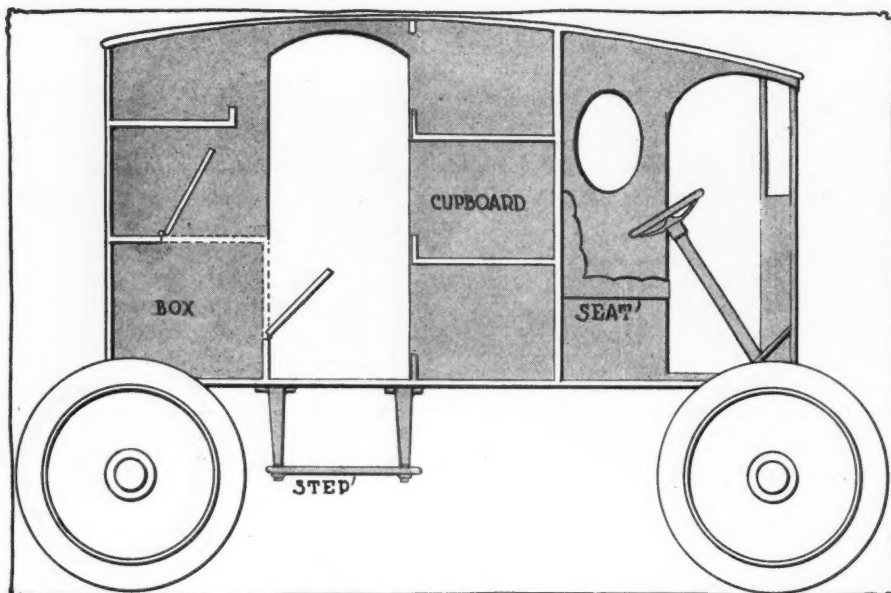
Body used by Piper Bread Co., of Chicago. Side view showing cupboards, and relation of seat
